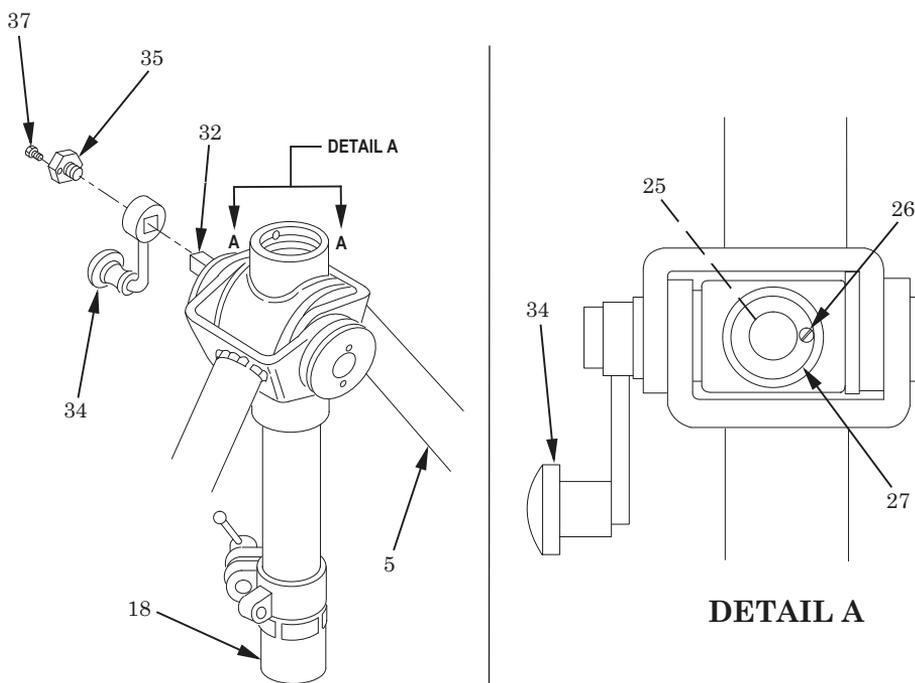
Alignment of Bevel Gear and Adjustment of Hand Crank.
